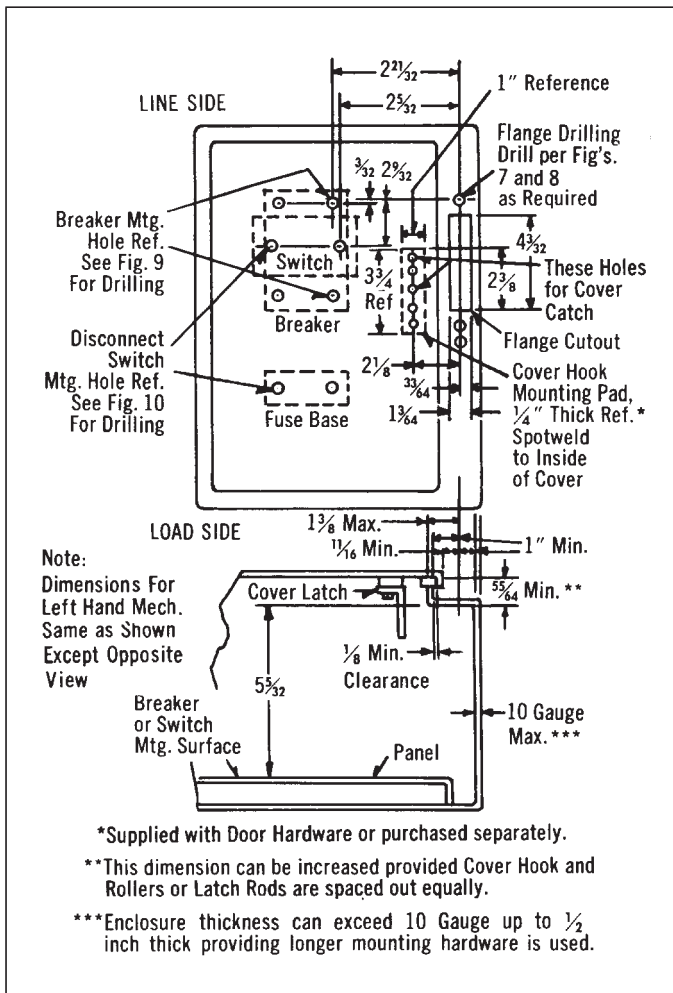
Recommended Enclosure Dimensions and Flange Cutout
